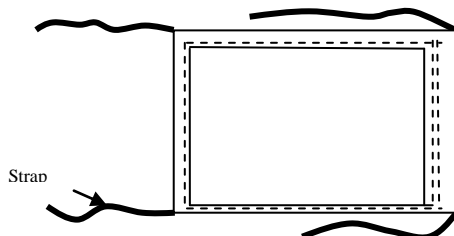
Final assembly showing straps to fasten the pad onto the body.
